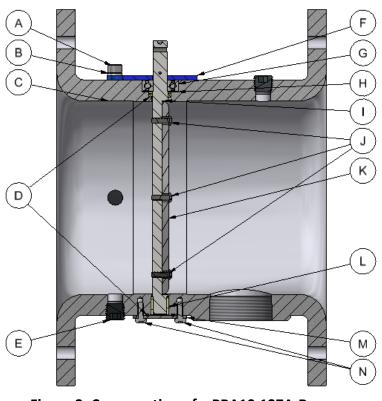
Cross-section of a PBA10.137A-Rxxxxxx
